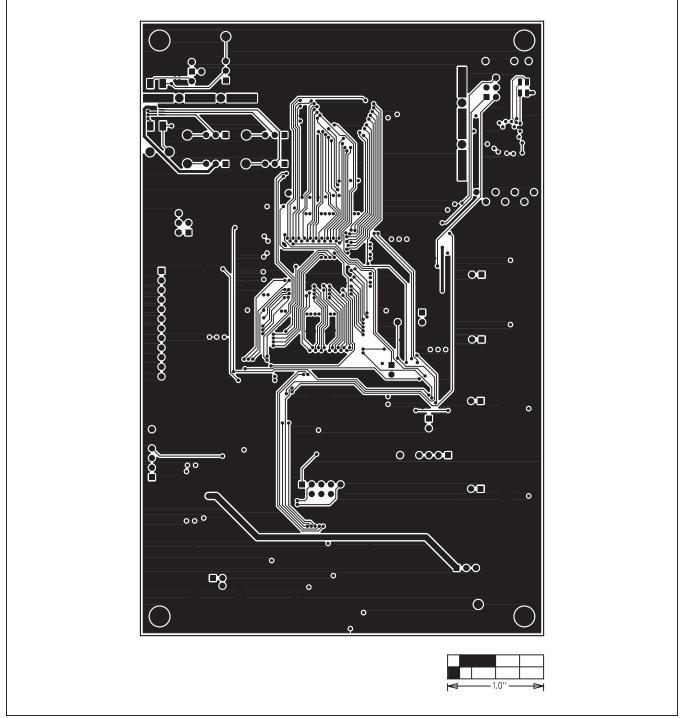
MAX44005 EV Kit PCB Layout—Component Side
